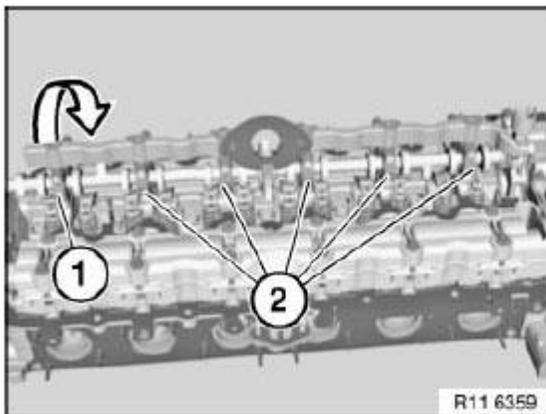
Identifying Bearing Cap Number And Bearing Caps
